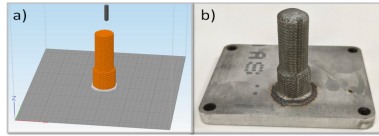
a) 3D-model of the FSW tool, and b) IN718 FSW tool manufactured by LMD.
